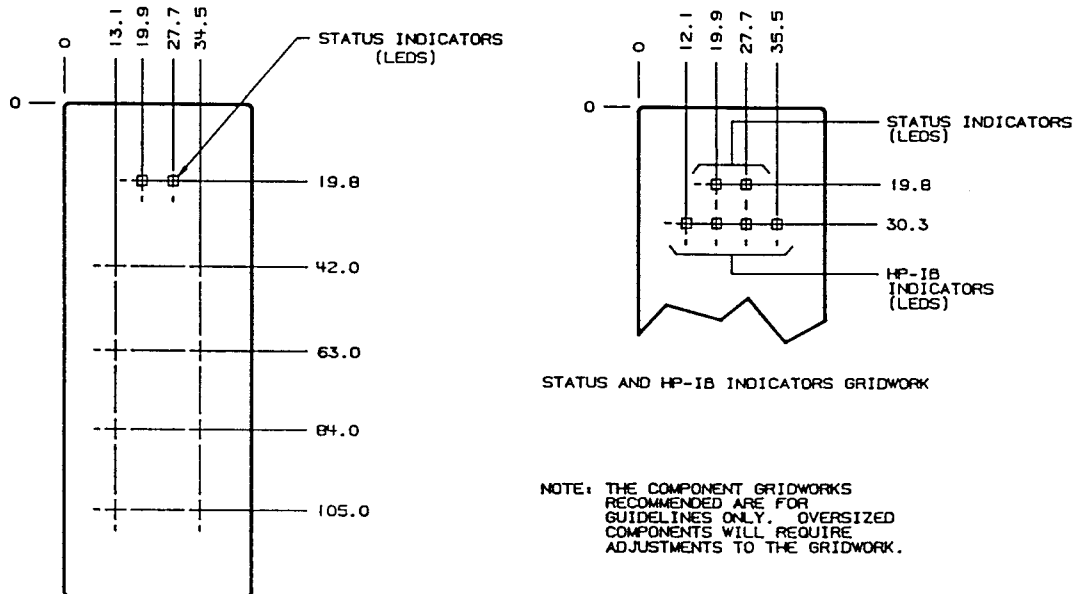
Front Panel 8 Component Gridwork, 1/8 Module
